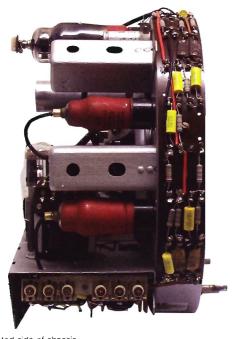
Completed side of chassis by feeding through unused holes in the top of the former (Fig.17). After securing
